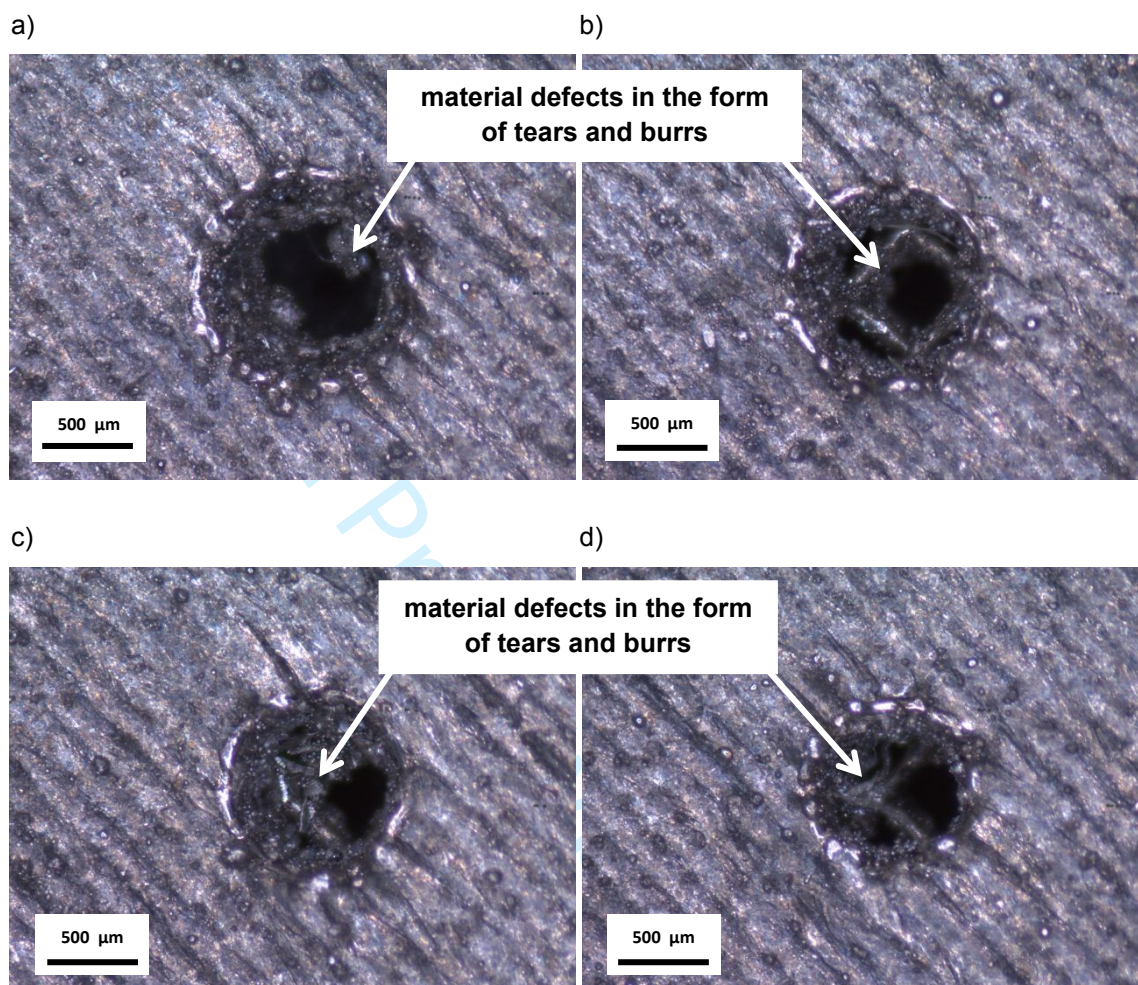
The 1 mm thick test sample manufactured from EOS Aluminium AlSi10Mg material with holes of assumed diameters: a) 1 mm, b) 0.9 mm, c) 0.8 mm and d) 0.7 mm
